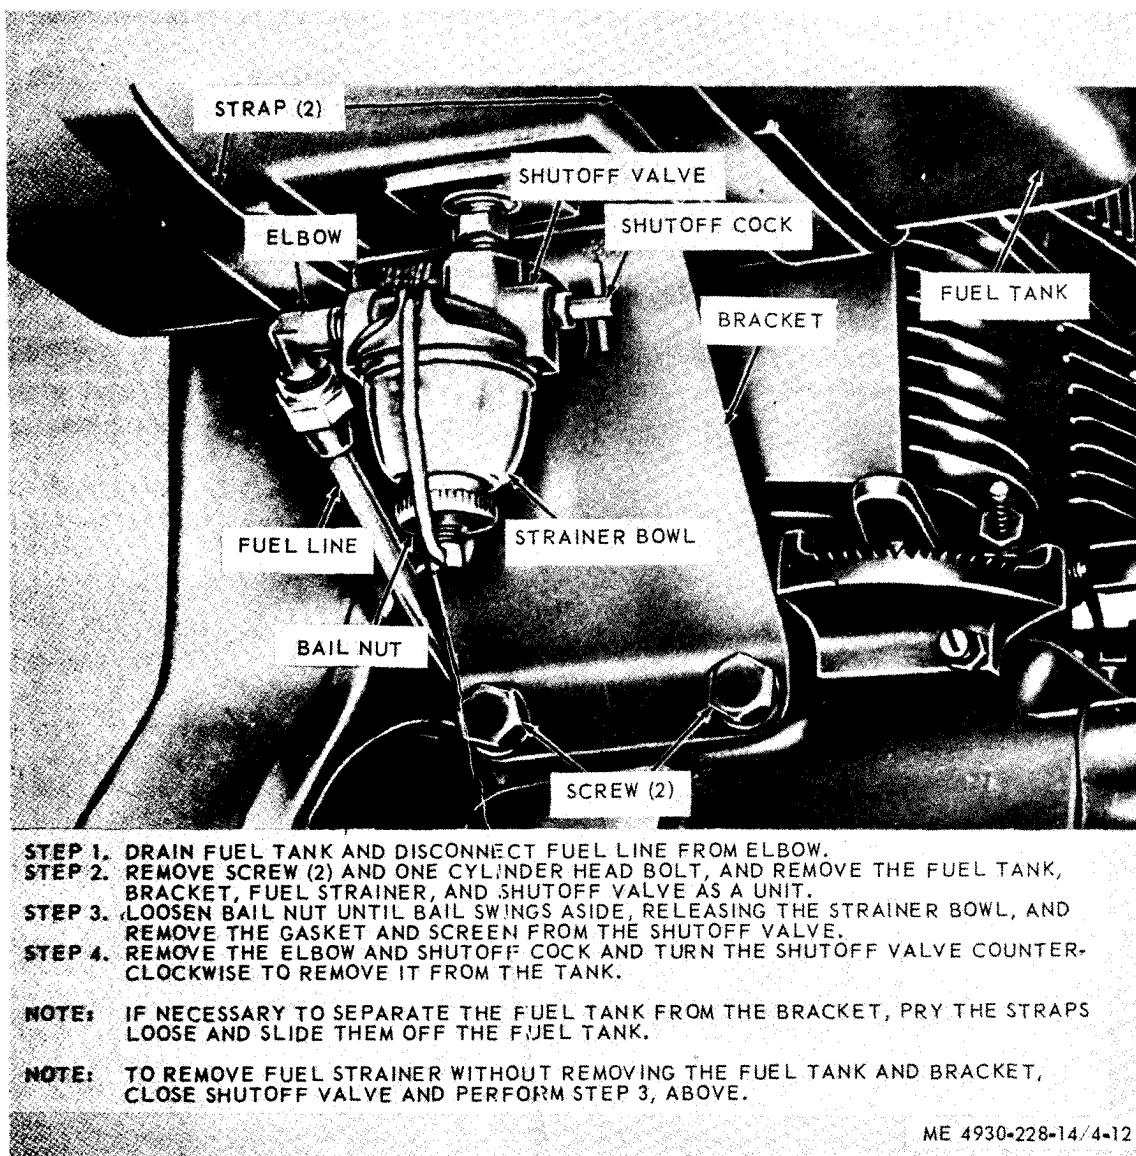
Fuel strainer, shutoff valve, fuel tank, and bracket, removal.
